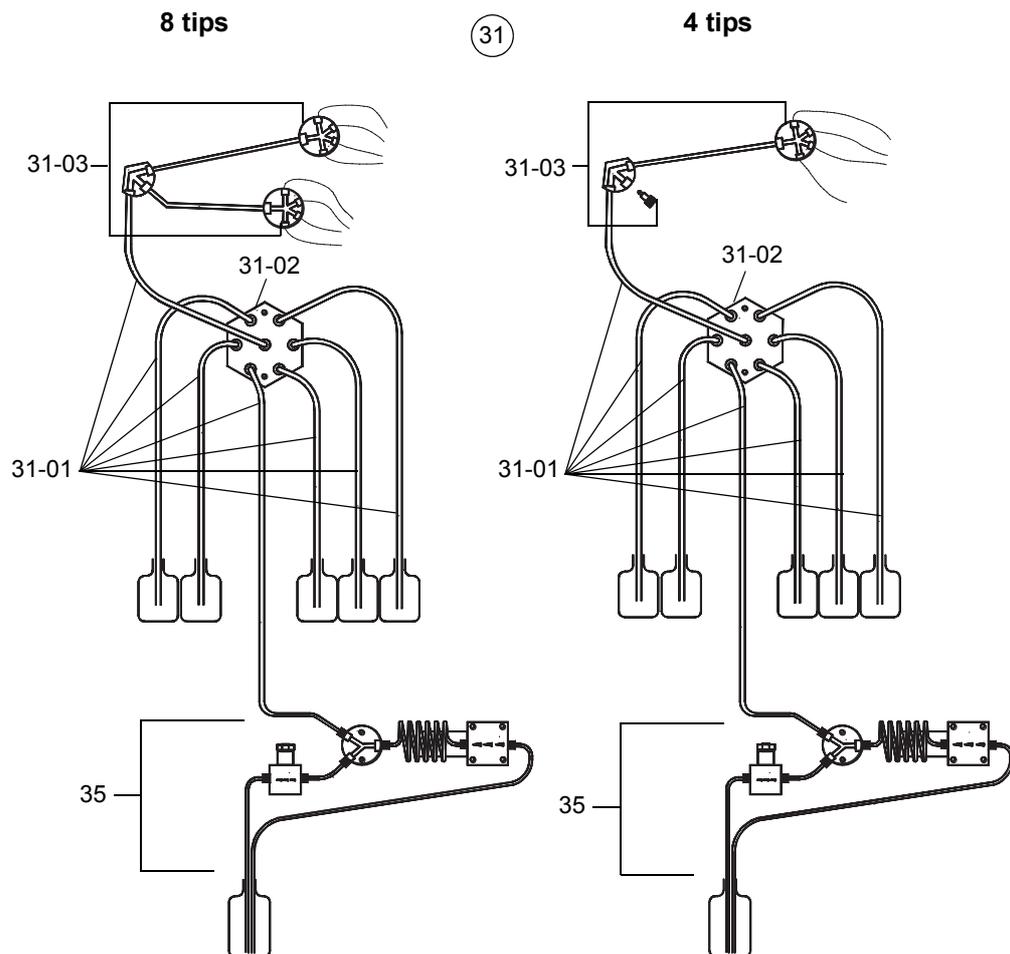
Spare parts for 6-way valve option (standard configurations)
